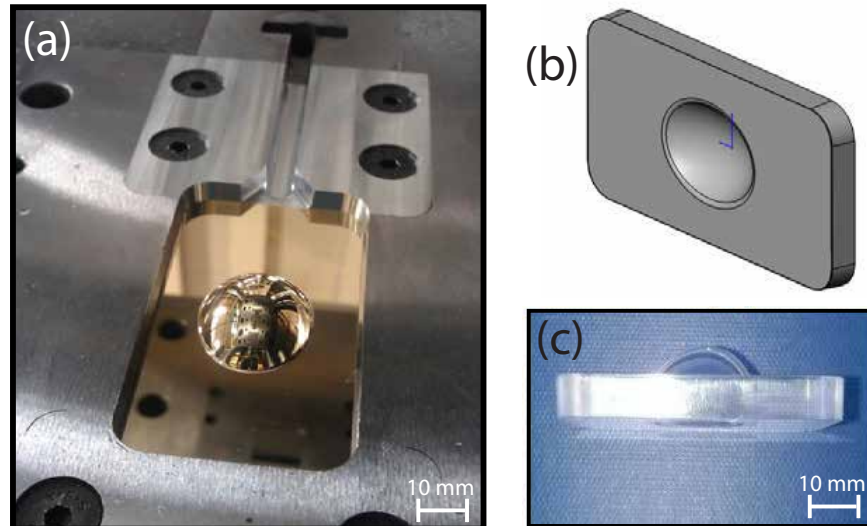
(a) Ultra-precise machined mould cast used in the injection moulding process, mounted in the injection moulding tool. (b) Schematic drawing of the injection moulded optic. (c) Photograph of the produced injection moulded FPM optic.
